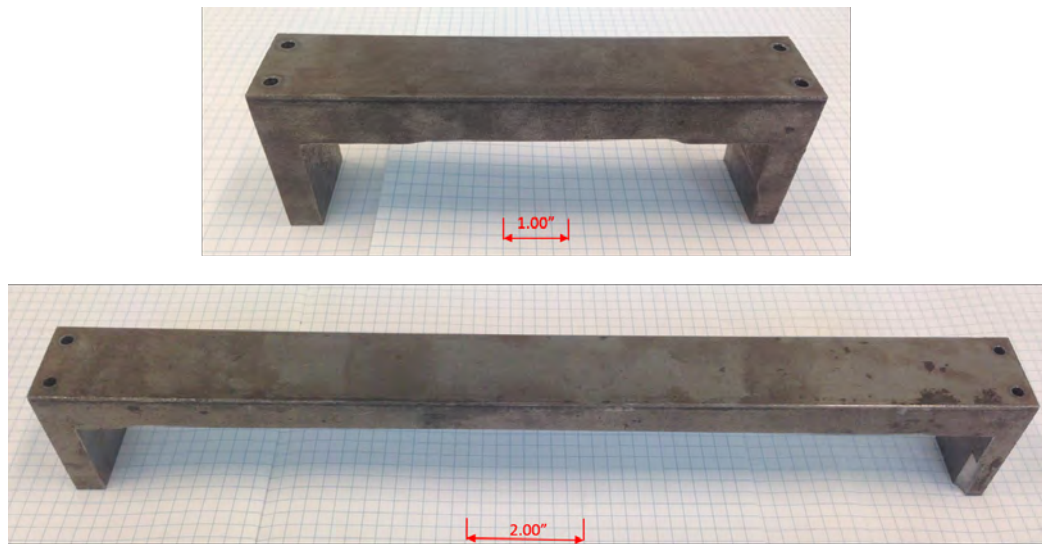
Backbones of coupon style (upper) and large geometry style (lower) transfer assemblies.
